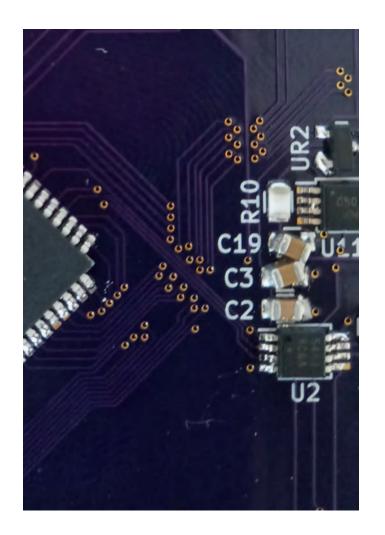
Looking at C19 and C3, the components shifted and were soldered together.
